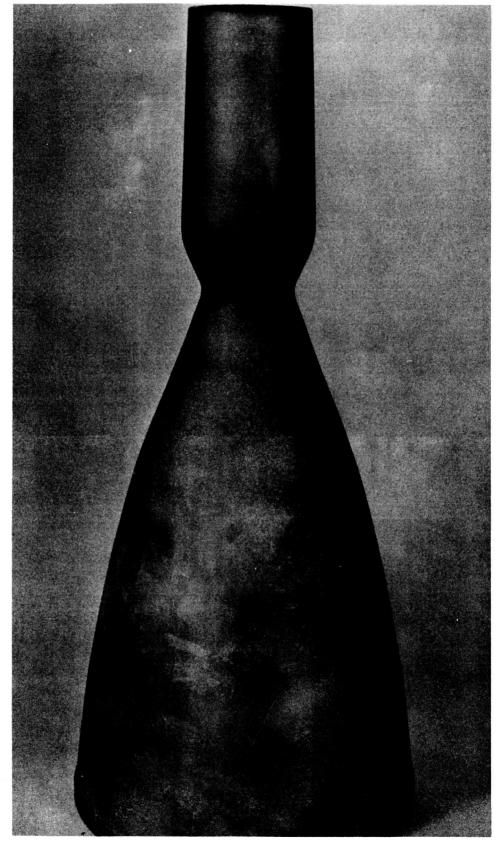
Chamber and Nozzle Extension for 100-lb Columbium Engine After Coating
